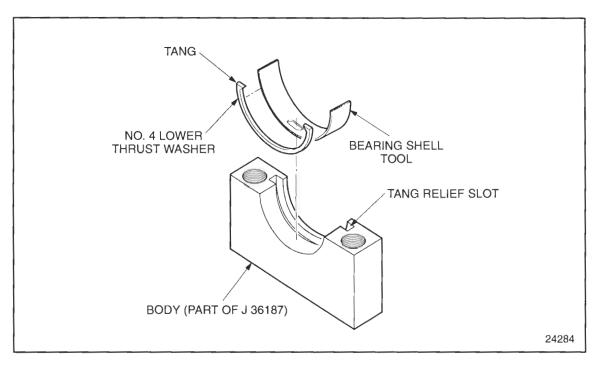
Upper Main Bearing Shell Removal–Tool Set–up
